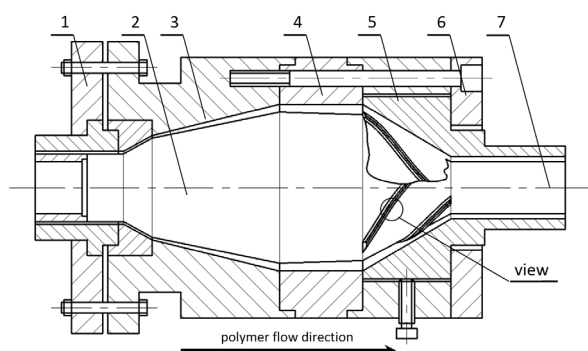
The extrusion head (longitudinal section): 1 – ring, 2 – conical core with helical line, 3 – body, 4 – connecting ring, 5 – nozzle body, 6 – cover, 7 – part of the nozzle with helical line
